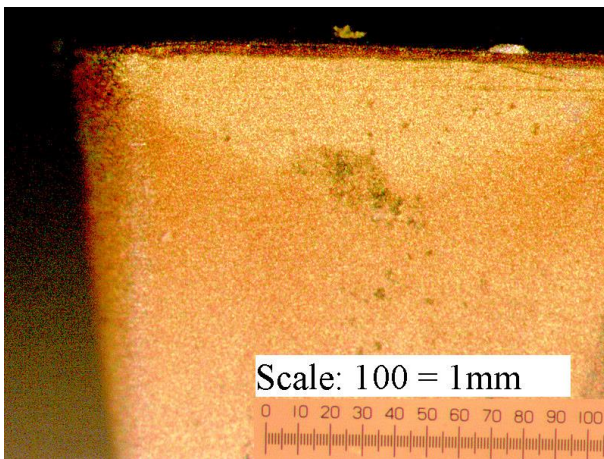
Picture showing flank wear for an air-cooled cut after 1 minute of machining at a cutting speed of 190 m min⁻¹ and feed rate of 0.23 mm/rev with a 2 mm depth of cut [7]
